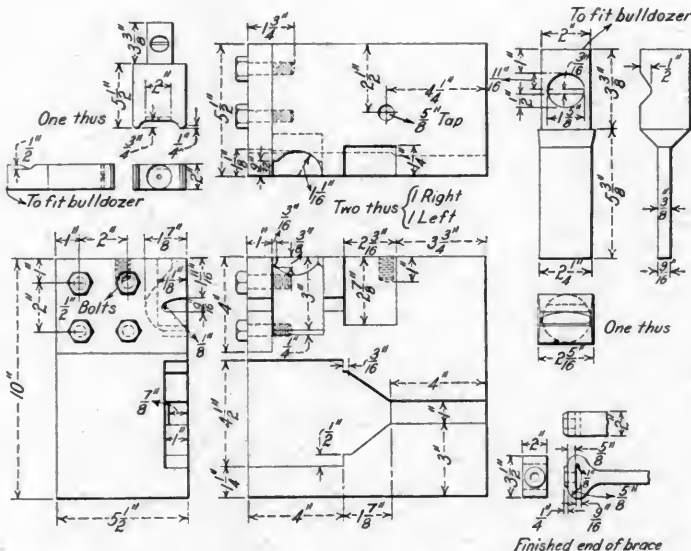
Dies for Forging the Back End of Back Tube Sheet Braces
